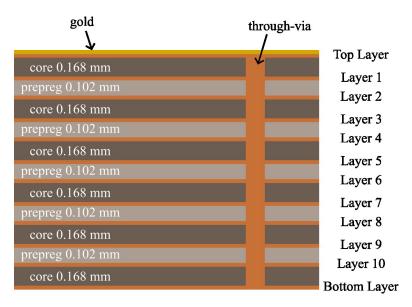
Shown is a simplified cross section of the PCB with all twelve layers used in the final design. The core and prepring layers are electrically
